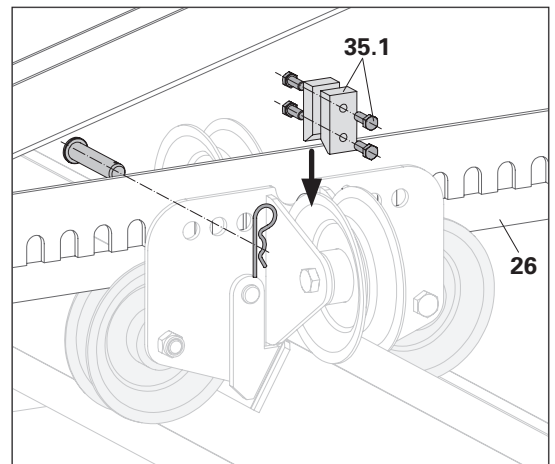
Bolts and cotter pins only on fixed bearing
